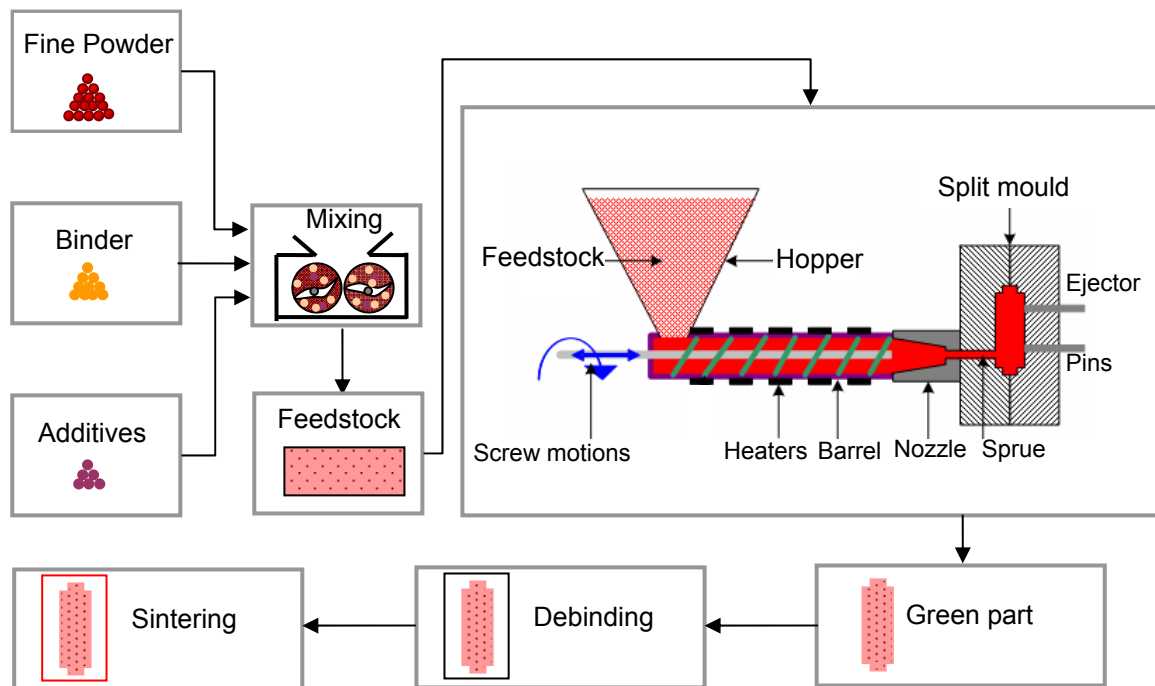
The basic sequence of the powder injection moulding process. The process involves the mixing of selected ceramic powder with binders to form the feedstock, which is then moulded in a mould cavity to form the required component shape. This shape undergoes a debinding process and is then consolidated by sintering.
